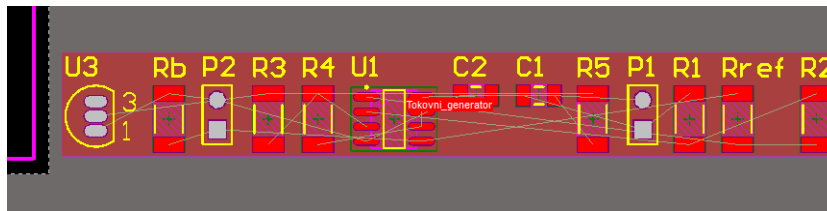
SHAPE OF ELEMENTS FOR PRINTED MATTER.
